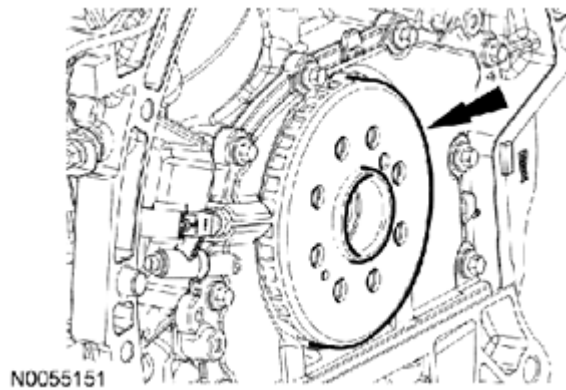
Locating Bead Of Silicone Gasket And Sealant Applying Area On Front Cover
